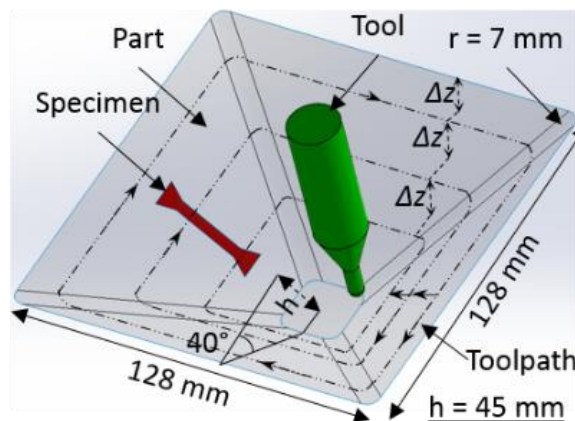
Schematic of part, specimen, tool, toolpath and incremental depth in SPIF
